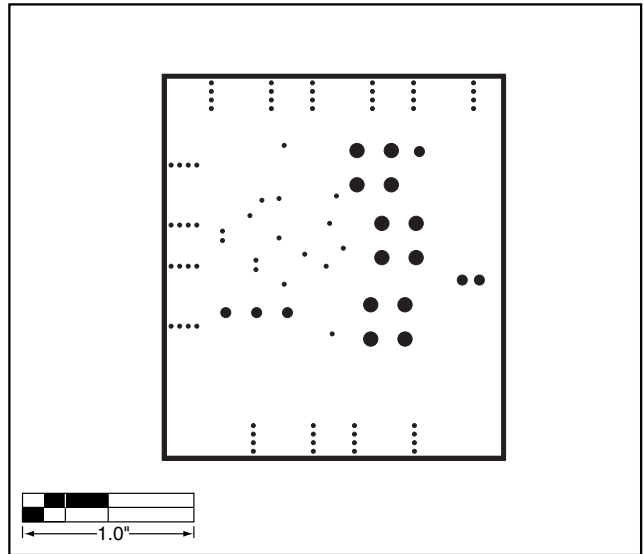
MAX2385/MAX2386 EV Kit PC Board Layout—Component Side
